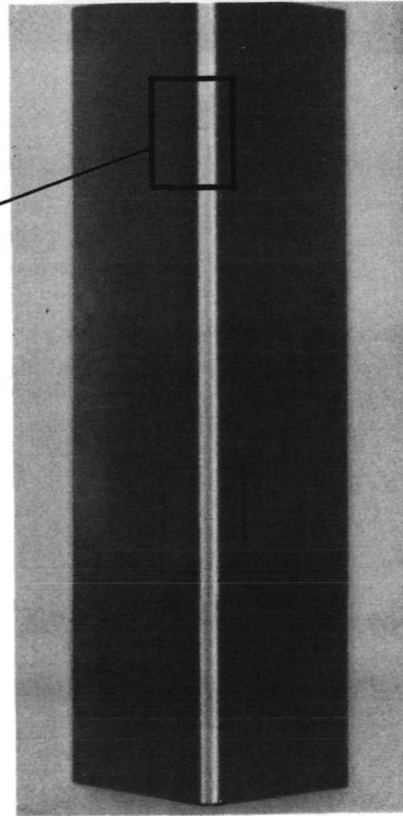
Brake Formed Parts of 0.25 mm (0.010 in.) Recrystallized TD-NiCr Sheet (Heat 3700) Showing Typical Small Cracks Parallel and Transverse to the Rolling Direction - Cold Rolled Surface Finish
